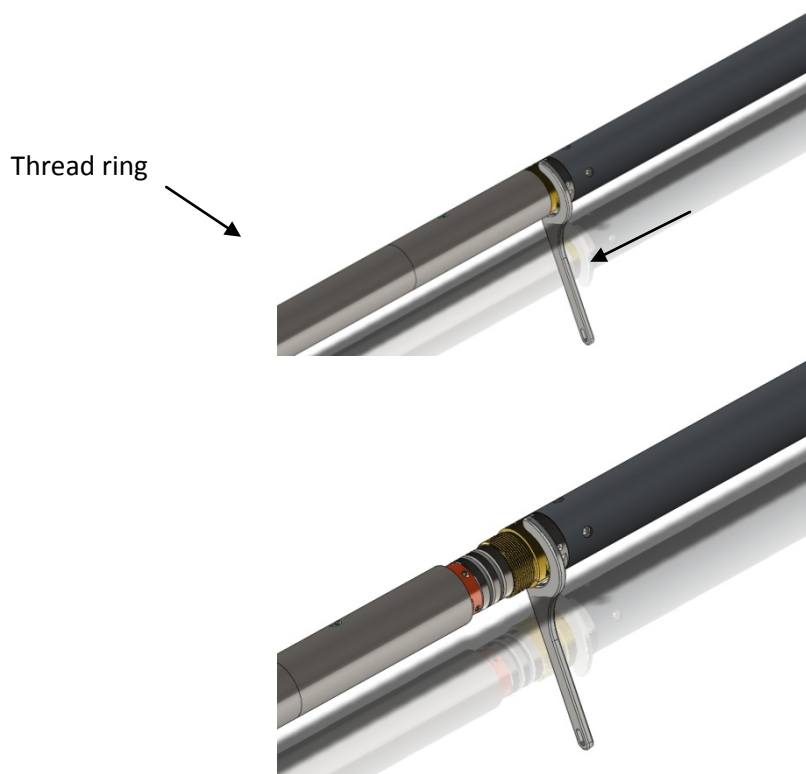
Unscrewing the thread ring and removing the bottom sub
